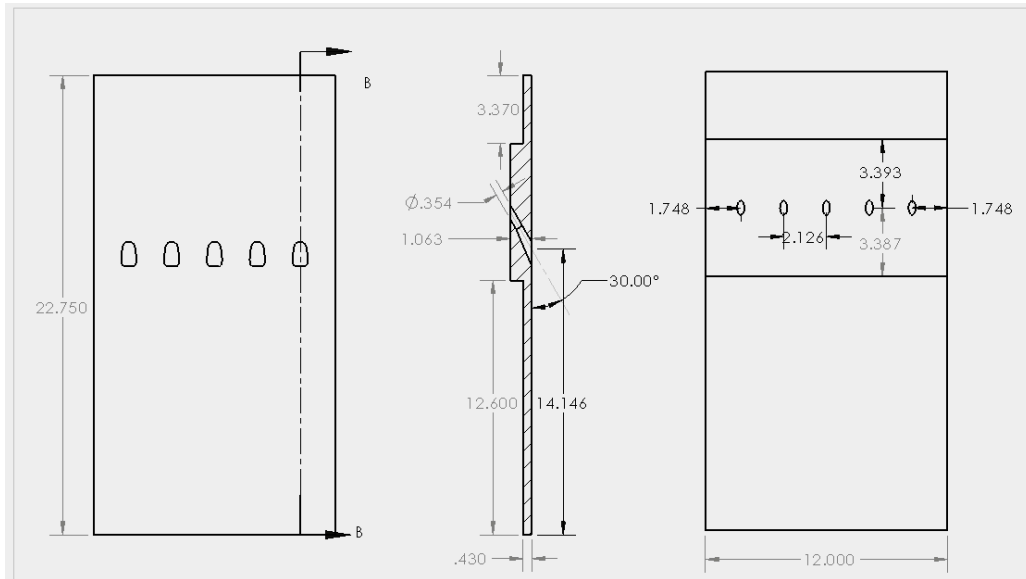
Solidworks drawing used to machine polyurethane test coupon for testing at PSU. Drawing is in inches.
